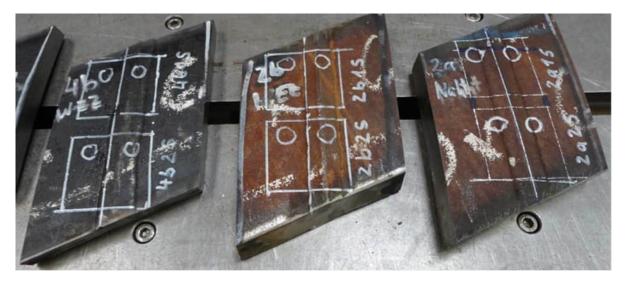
Removal of samples from a spiral welded pipe
